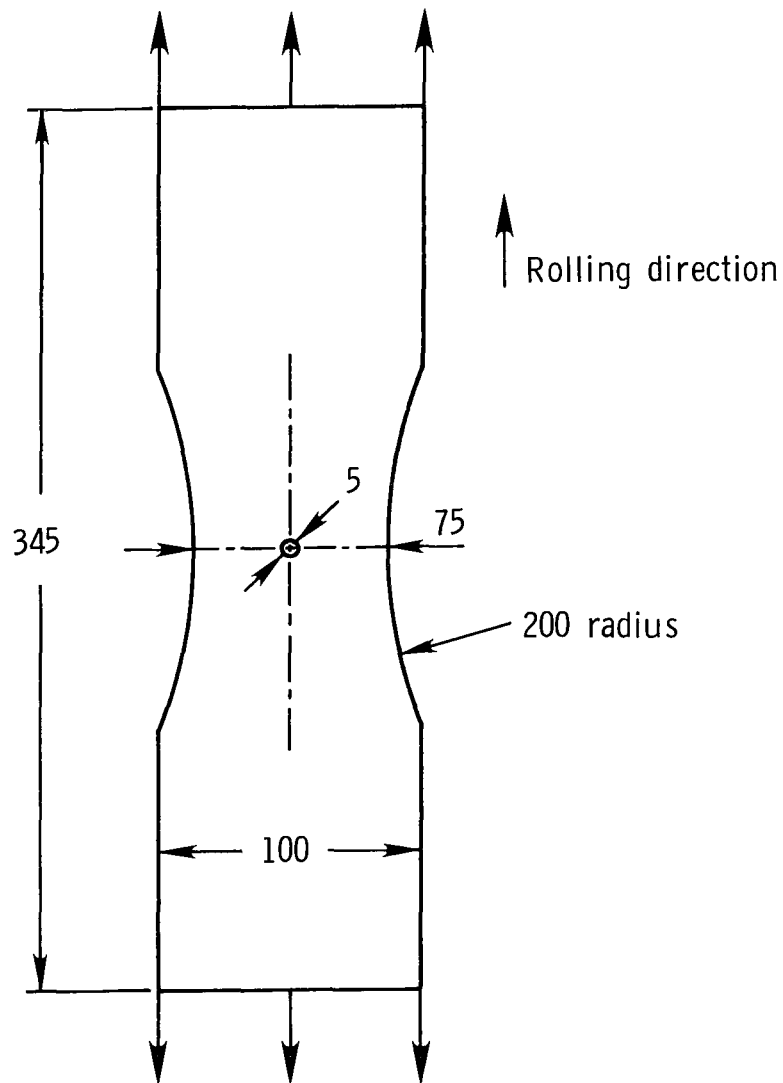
Fatigue specimen. Material: 2024-T3 aluminum alloy; thickness, 2.28 mm. All dimensions in mm.
